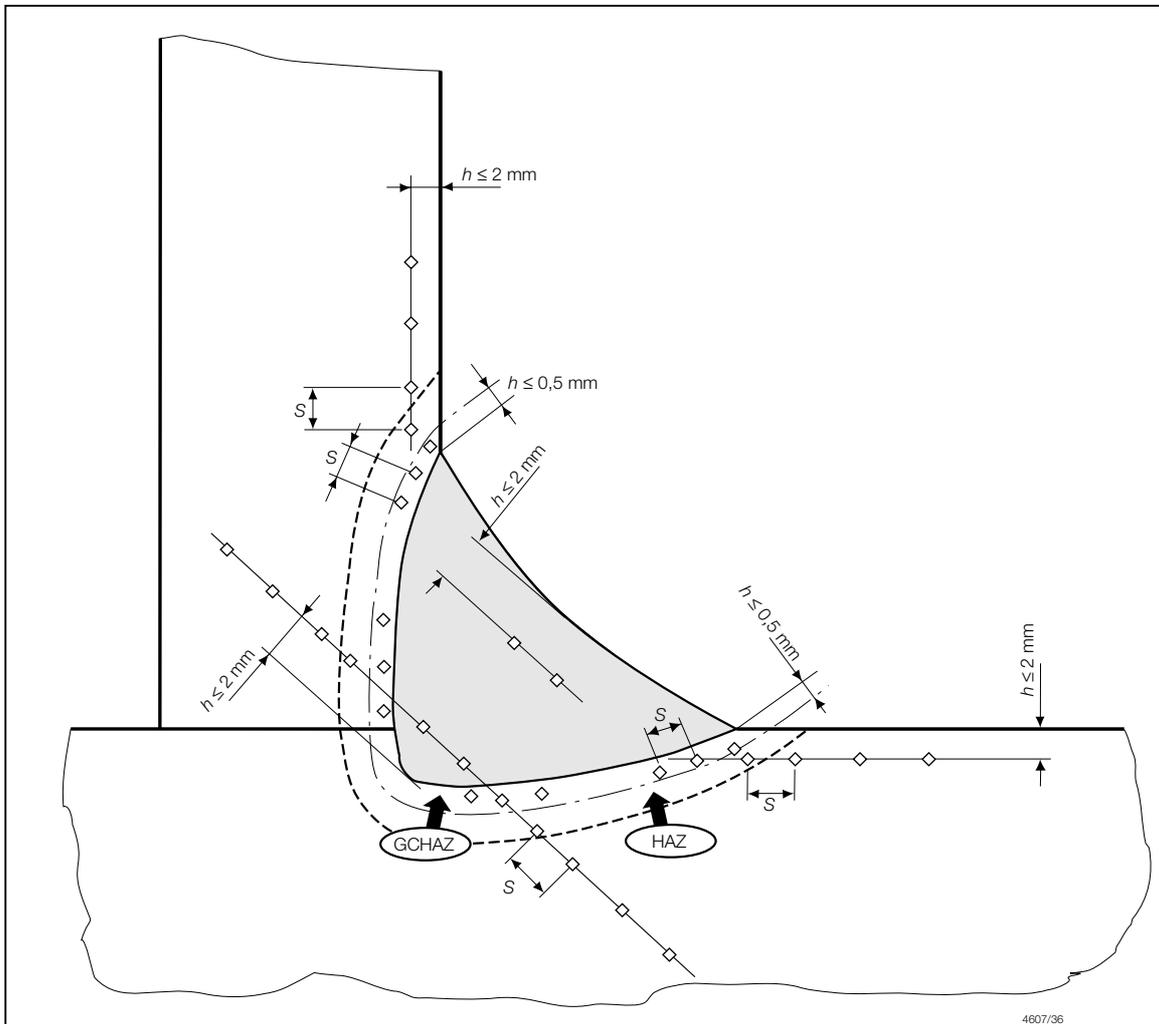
A.4 Example showing the position of the indentations for hardness testing in the heat affected zone, weld metal and parent metal of a fillet weld (dimensions in mm.)
